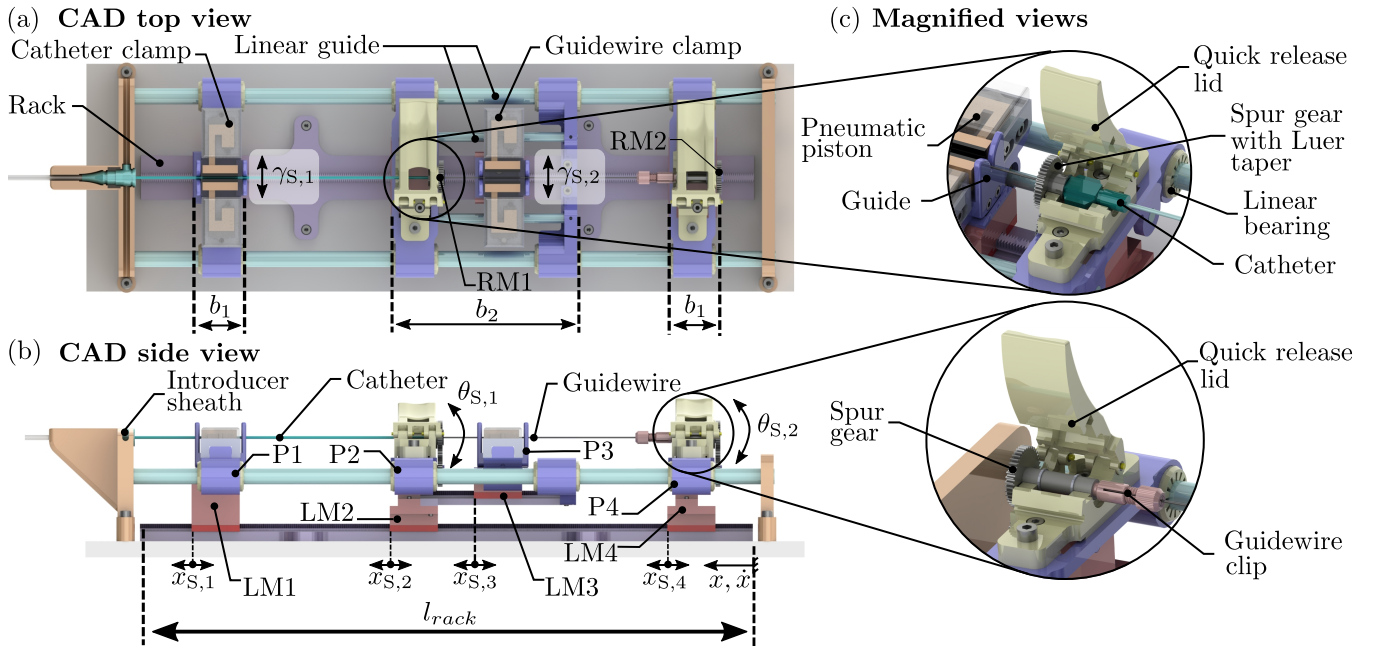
Conceptual design of the proposed slave robot: (a) Top and (b) side view of the CAD model, and (c) magnified details of quick release instrumentation mounting and mechanism for introduction of rotary motion to catheter and guidewire.
